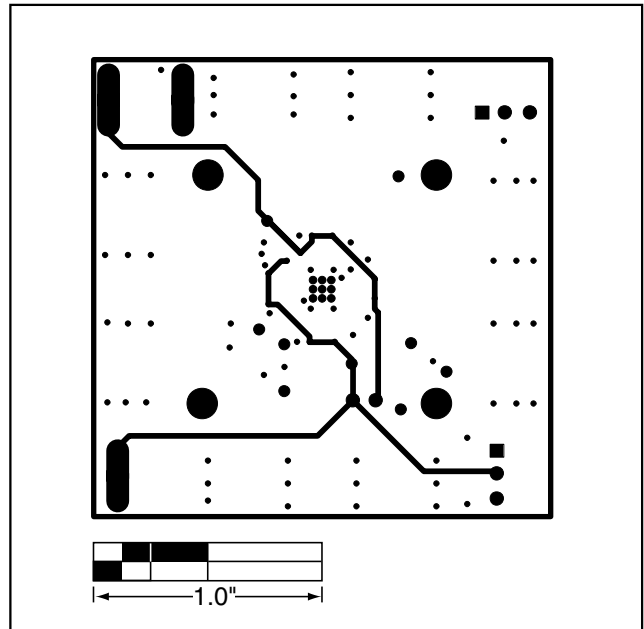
MAX3800 EV Kit PC Board Layout—Power Plane
